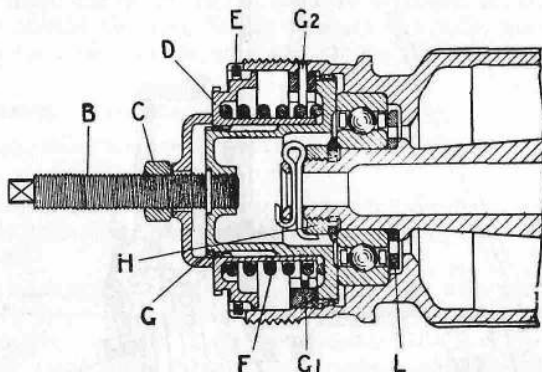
TOOL IN POSITION FOR REMOVING LOCKING RING.
